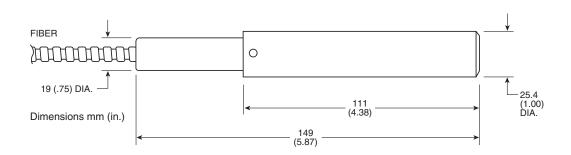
Optical Lens Assembly (L1) .19" @ 20" FOV
